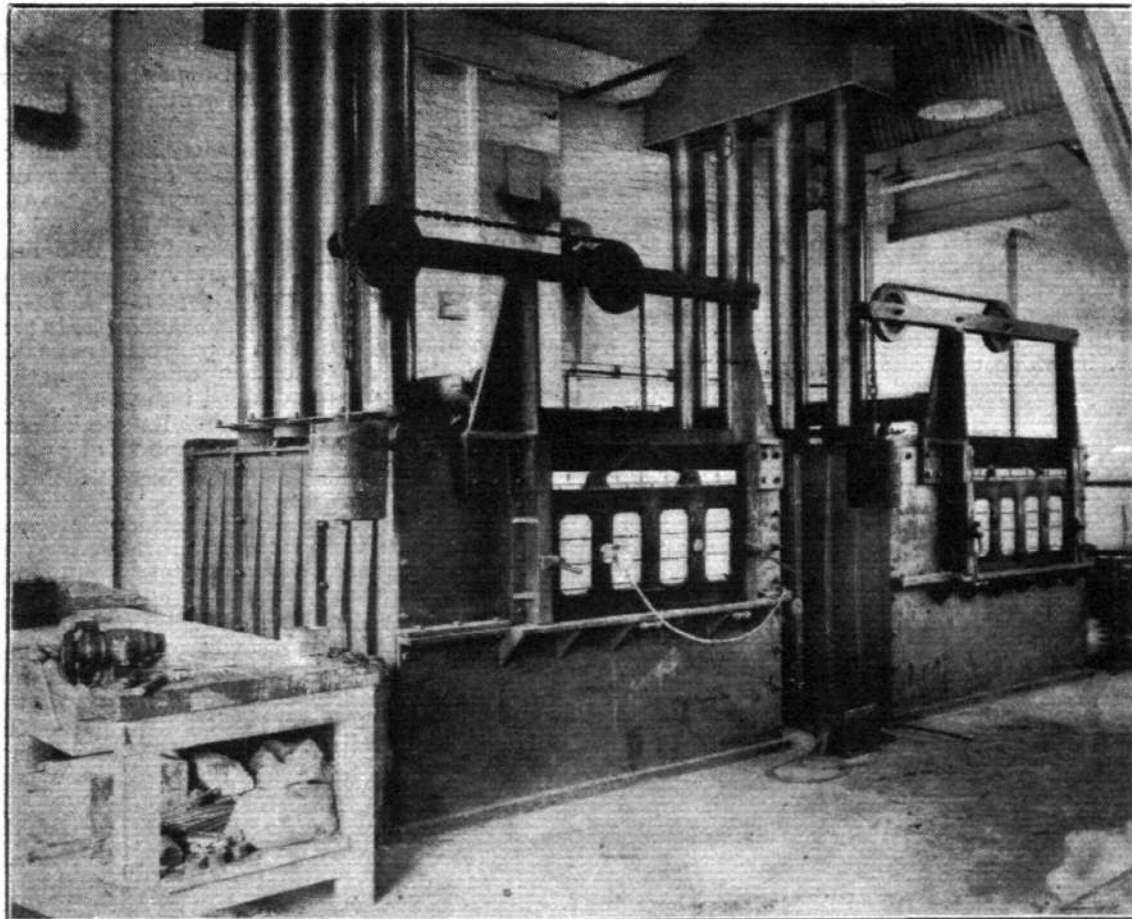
"Richmond" L.P.G.A. furnaces for the heat treatment of aero engine components
